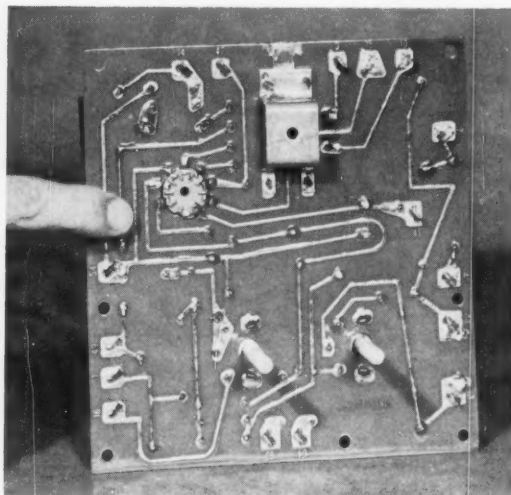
Printed wiring used on a printed-circuit board on an adjustable-speed drive control.
